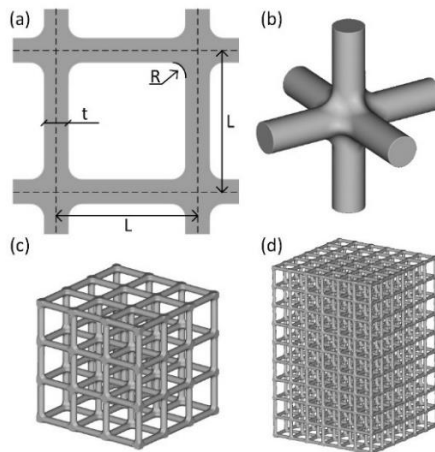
The geometry of the cubic lattice samples, (a) Unit cell configuration parameter definition of in-plane geometry (R = fillet radius, t = strut thickness, and L = cell size or strut length), (b) 3D view of junction with concave fillet, (c) assembled design for manufacturability study, and (d) assembled design for mechanical testing.
